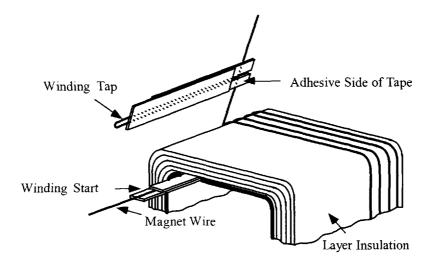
Tap Lead Using Tape: Step 2, Showing the Compressed View.
